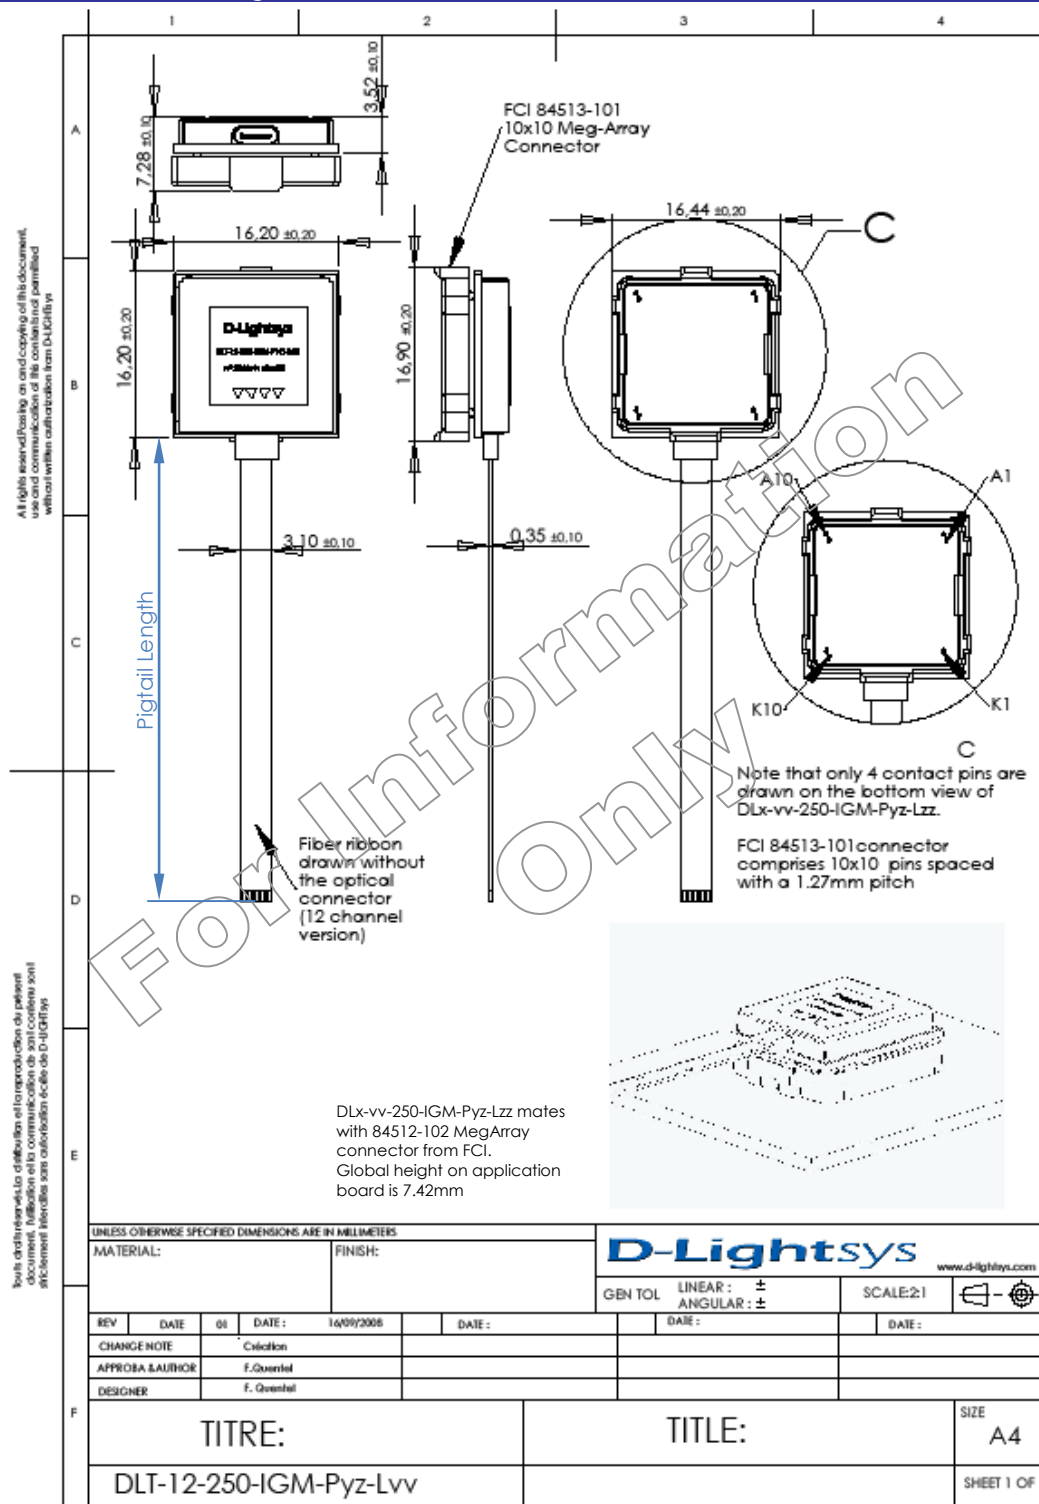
DLx-xx-25x-IGM-Pyz-Lvv mechanical drawing
